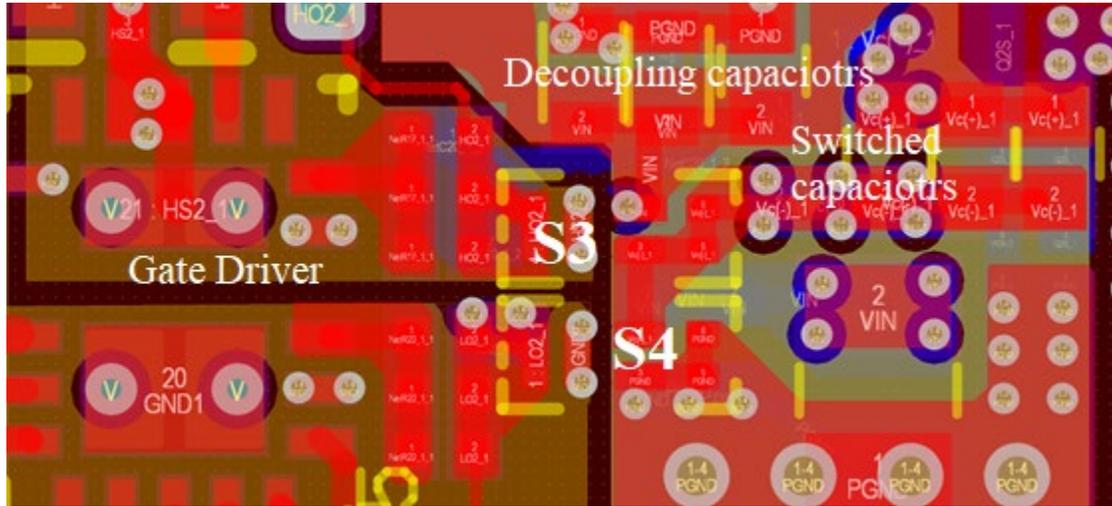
PCB routing and part placement of switches S3, S4, and their Gate driver IC along with input decoupling and cascaded switching capacitors on the top side of the PCB.
